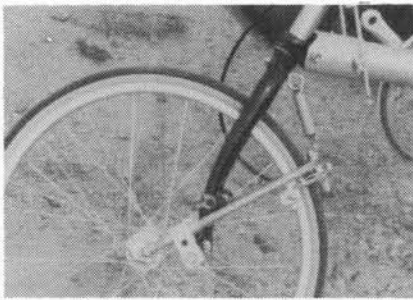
Front end of Bill Murphy's recumbent. Seat-post clamps are used on steel head tube. Bolt through top seat-post clamp holds clamps around steel rods. Bolt through main frame tube also holds clamps around steel rods, so head angle can be adjusted. Main frame tube, 50-mm dia., fits inside a reinforcing tube.
